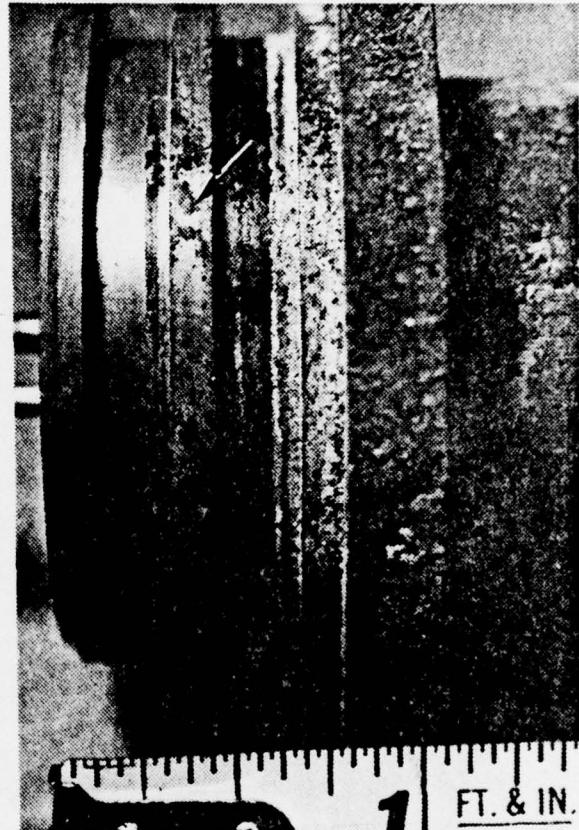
Corrosion Between O-rings, X Preamplifier Cable Seal End Cap (Enlarged 2X approx.)
